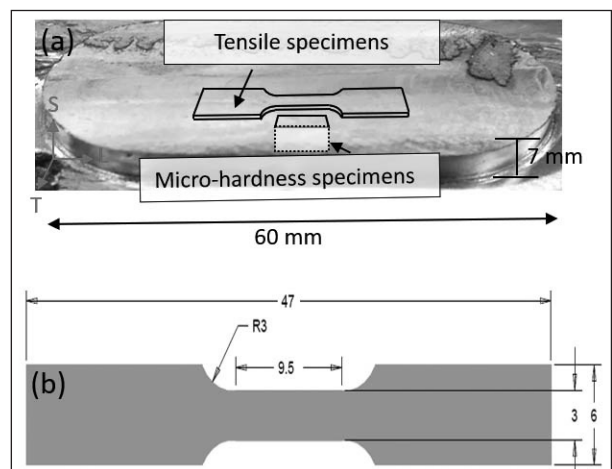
Showing (a) Reference location in the deposit for tensile and micro-hardness specimens; (b) schematics of tensile sample.
